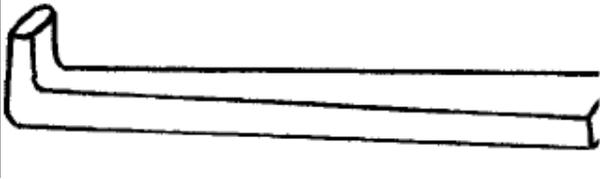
The armrest is a smooth steel shaft about 7- to 9-in. long. That can be fit into a handle. The left hand grasps the tool rest and the left thumb presses the tool down onto the armrest and the entire assembly down onto the tool rest. The tool rests against the hook on the armrest so side pressure can be applied as threads are cut.
